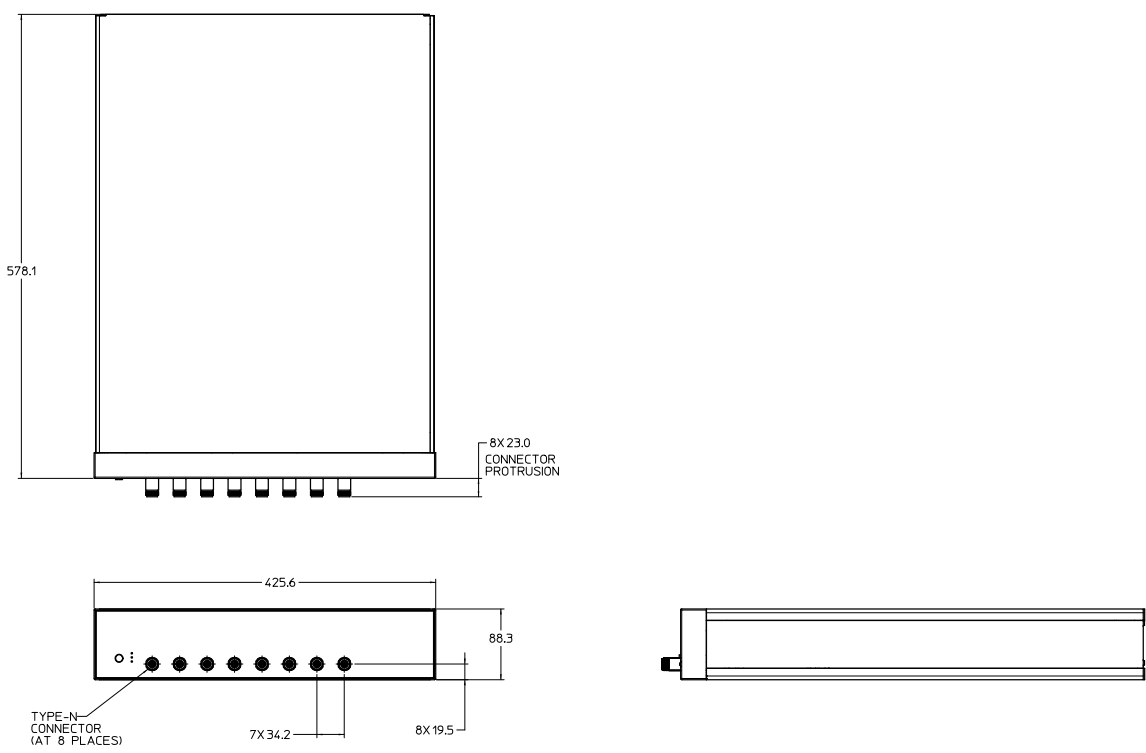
Mechanical dimensions of the J7204A/B with Type-N connector
